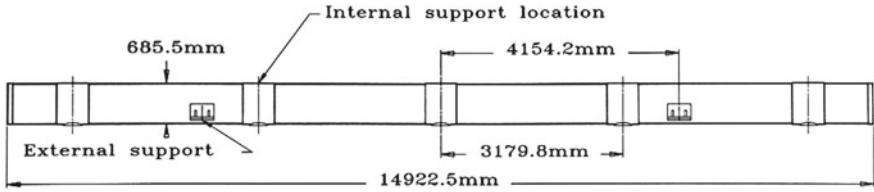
SSC 50 mm collider dipole vacuum vessel layout
